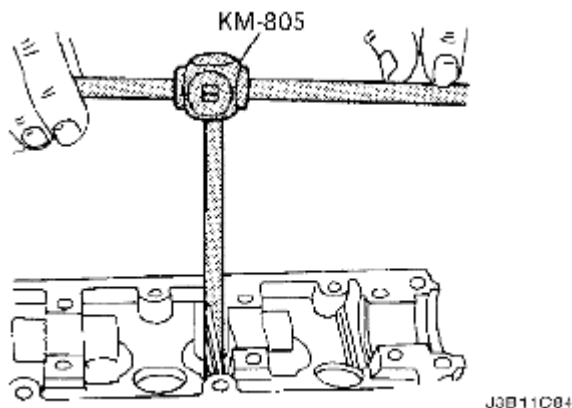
Identifying Valve Guide Reamer (KM-805) On Upper Side Of Cylinder Head
